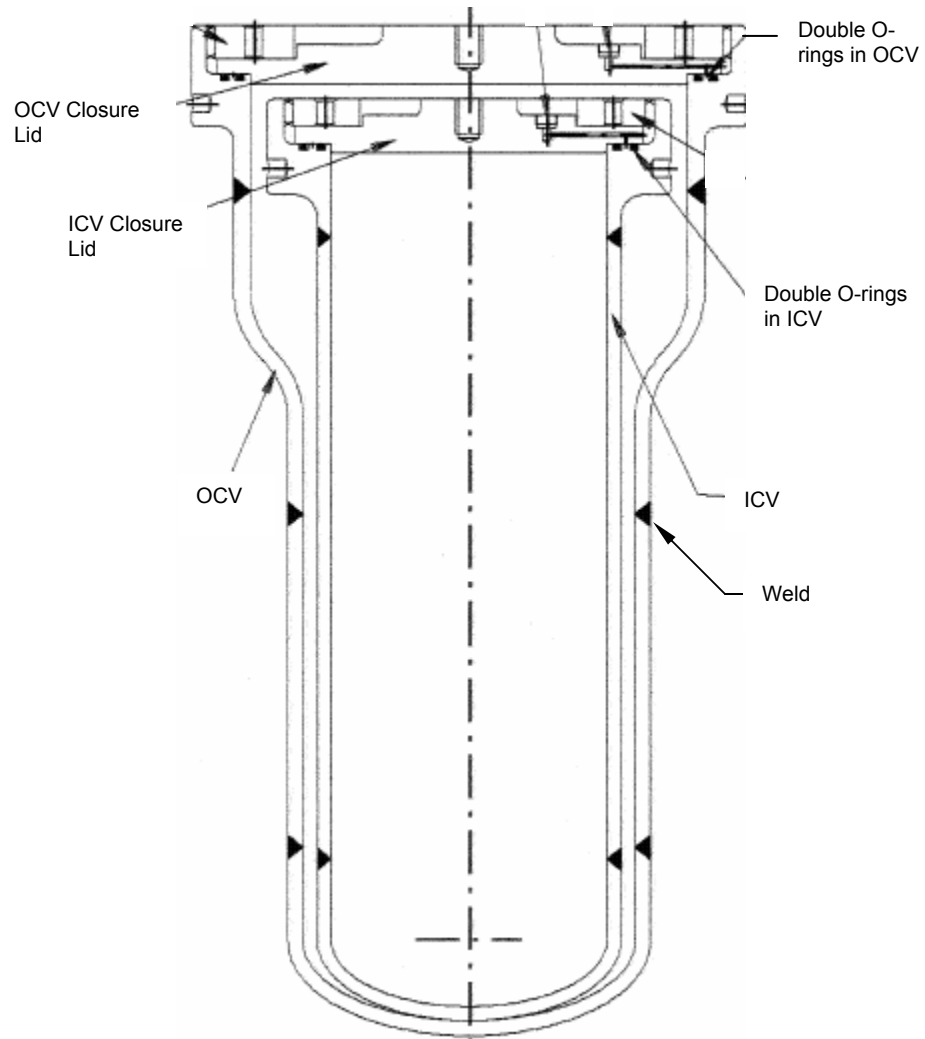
Inner and outer containment vessels in SAFKEG 3940A. The vessels are welded 304L stainless steels.
